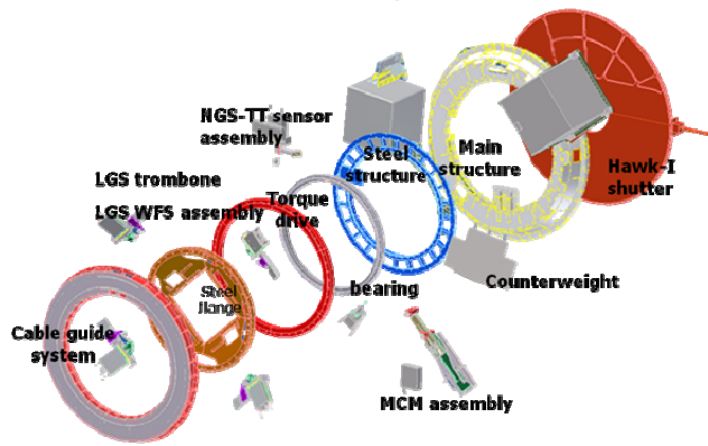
GRAAL exploded view. The light comes from the upper-right, and the shutter of Hawk-I protects the AO module from incoming dust and wind. Two electronics cabinets are attached to the main structure.
